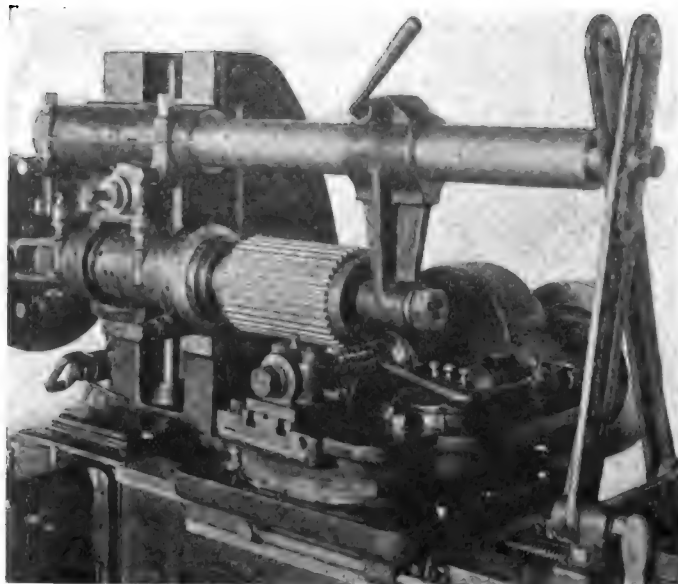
Hobbing seven spur gears (horizontal class gear hobbing machine)
